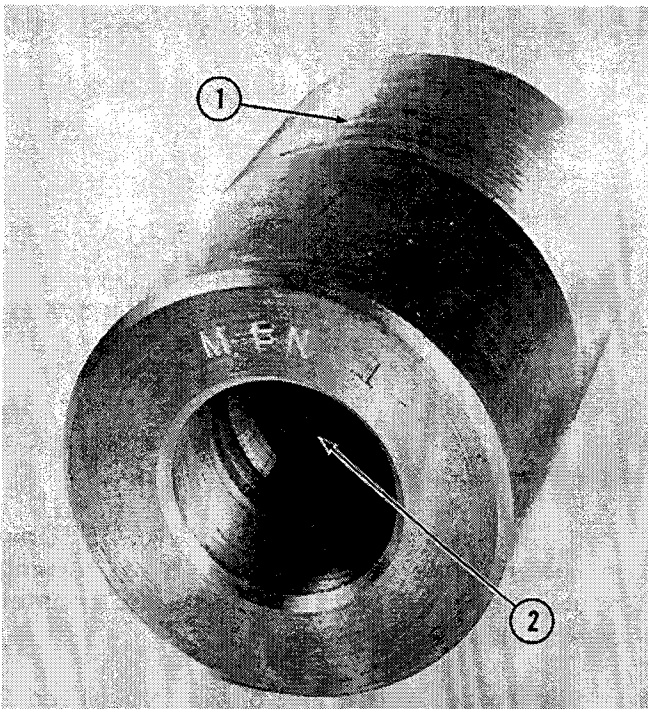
CLUTCH HUB PULLER, MFN-1
